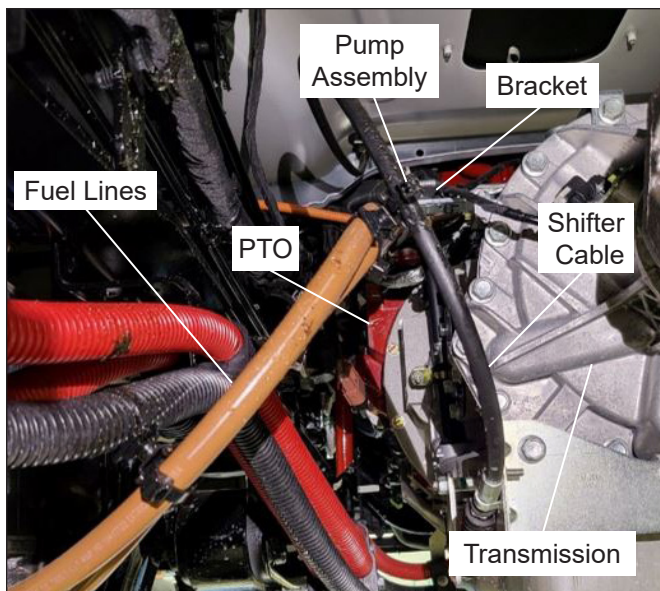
Fuel Lines and Shifter Cable Inspection Angle One
